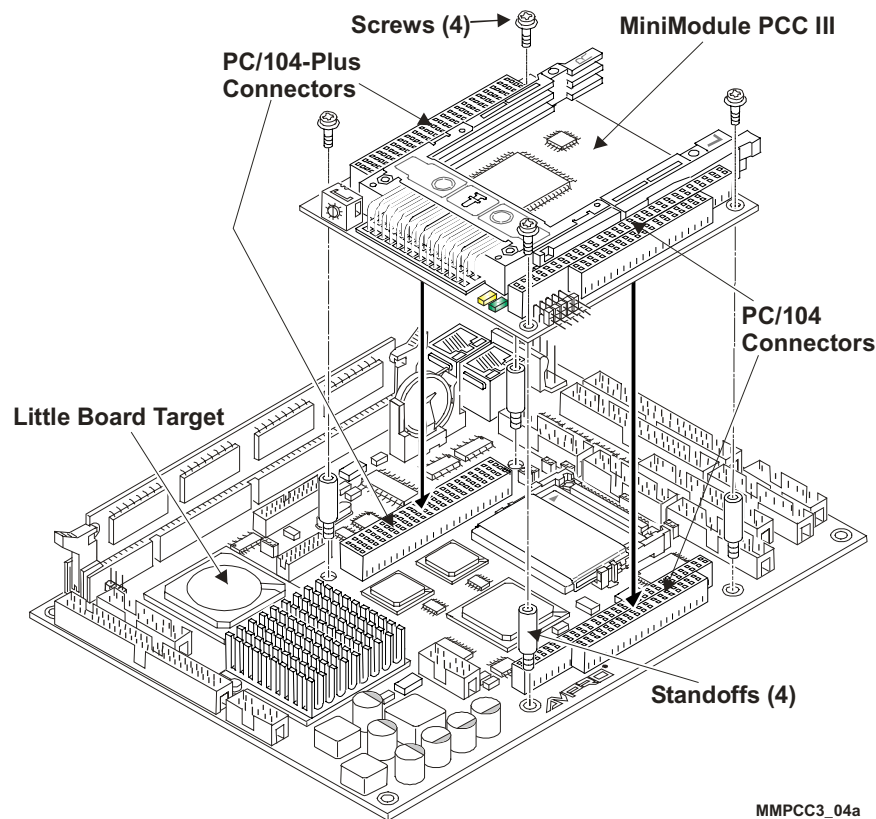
Installing MiniModule PCC III on Little Board Target
